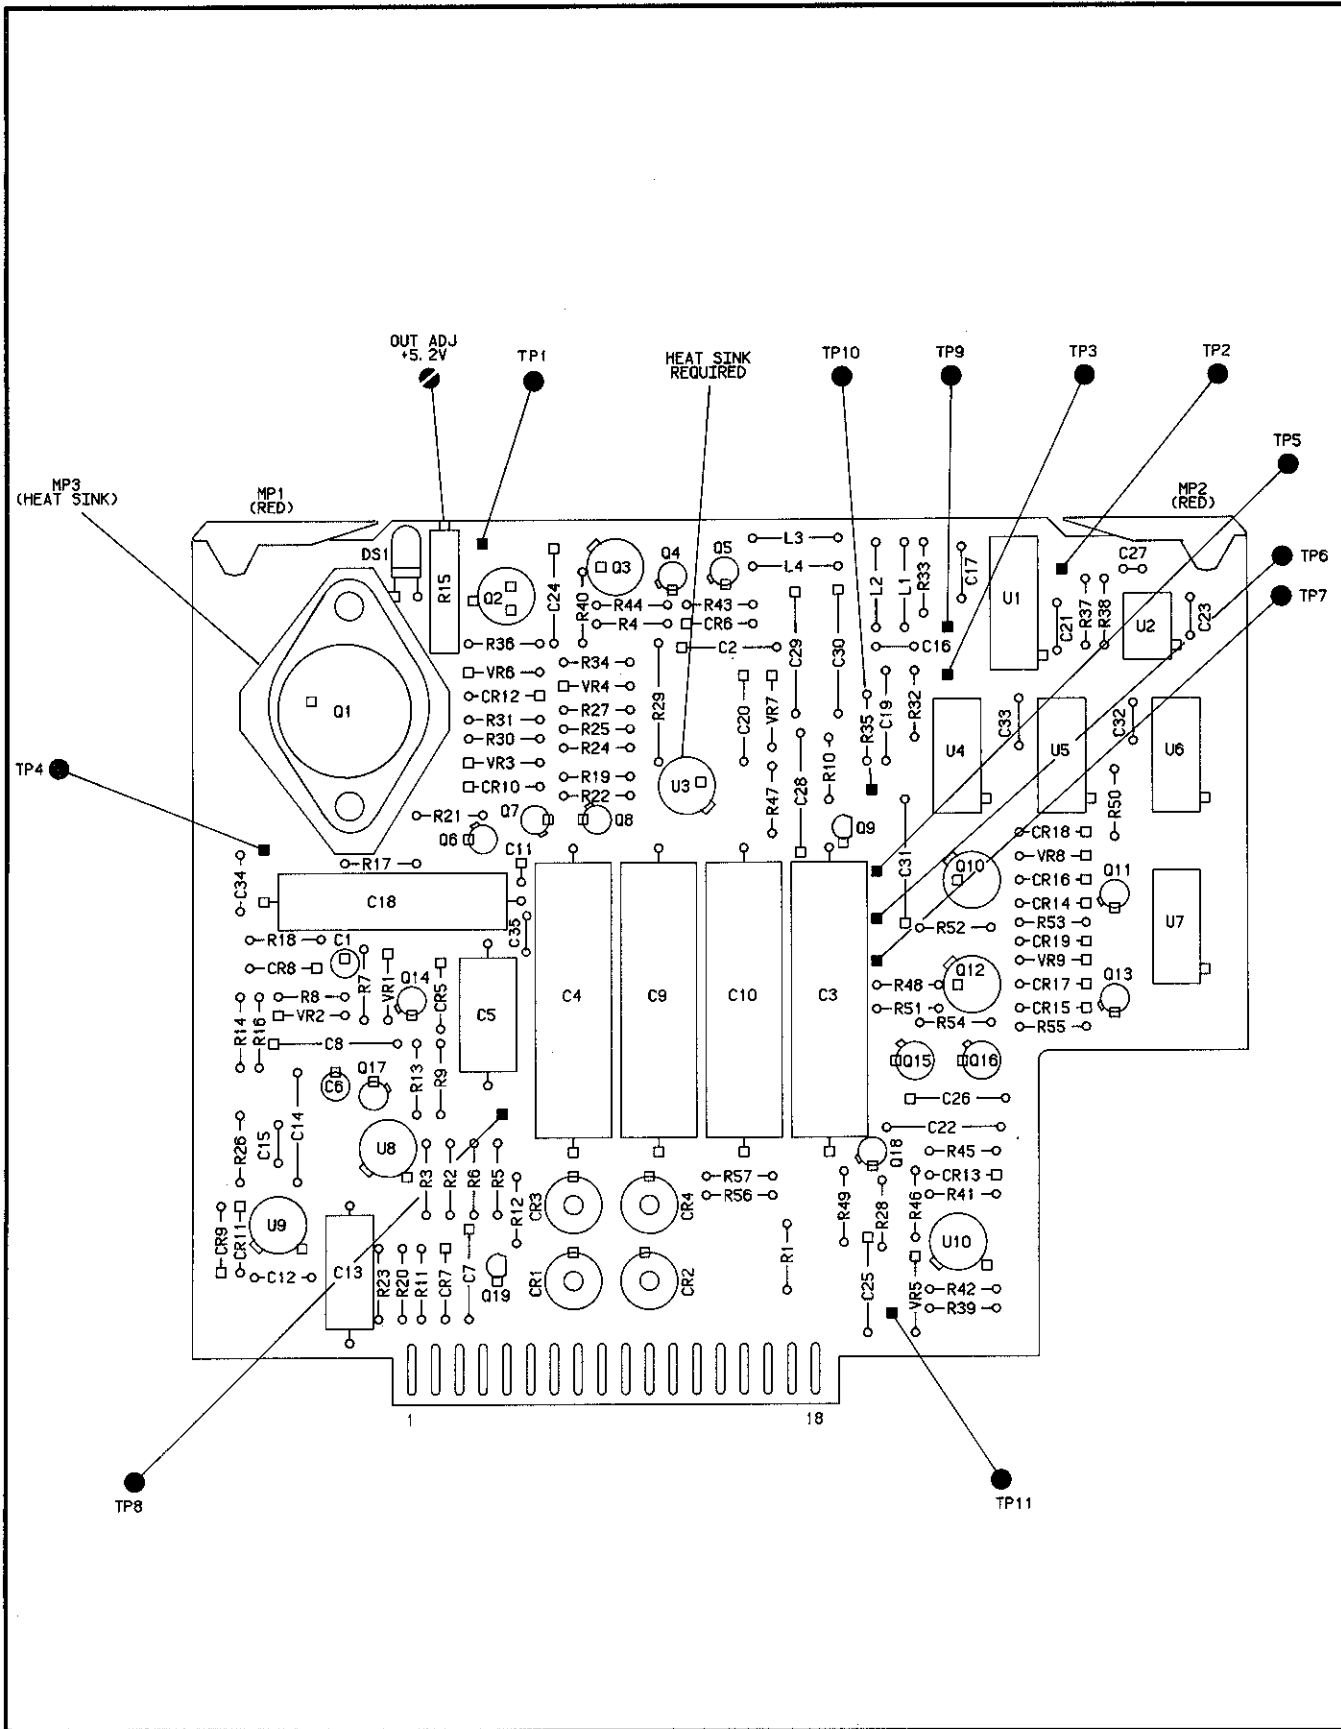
A7A2 Power Supply Control Board Component Locator
